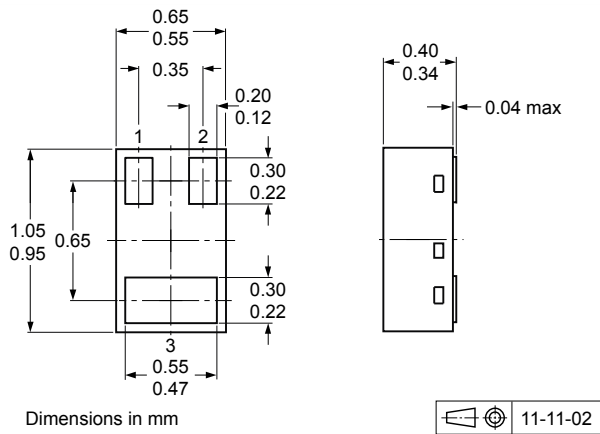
Package outline DFN1006B-3 (SOT883B)
